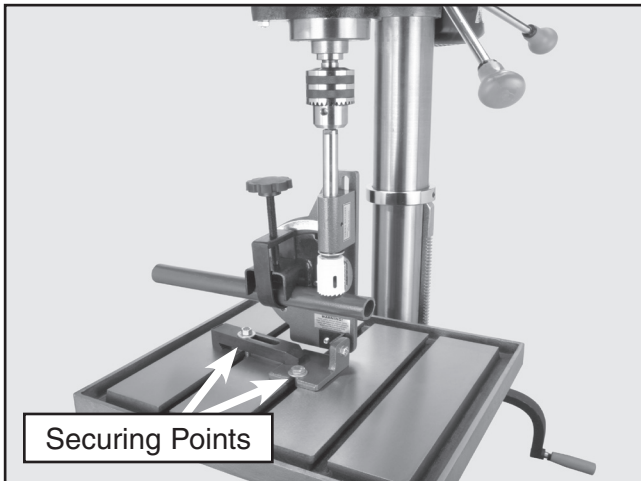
Mounting the jig to a drill press using a strap clamp in one location and a bolt with a t-nut in another location.
